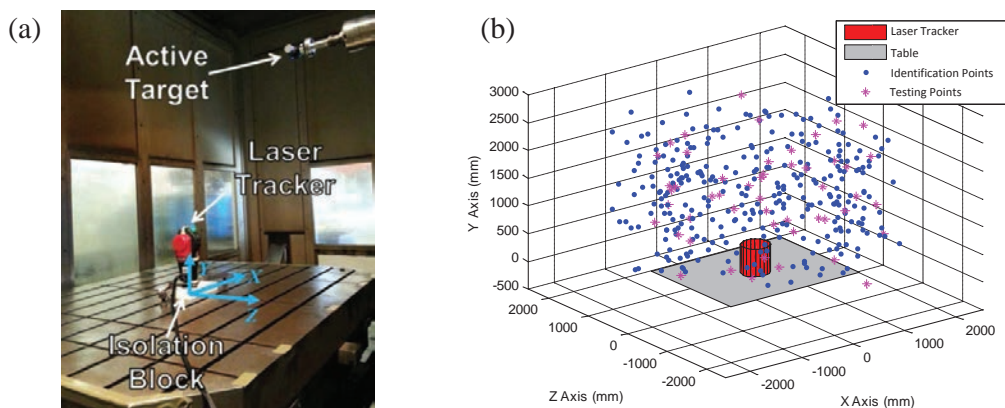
(a). Machine tool work cell and table base frame; (b) Positions of identification and testing points inside working envelop, given in machine tool base frame.
